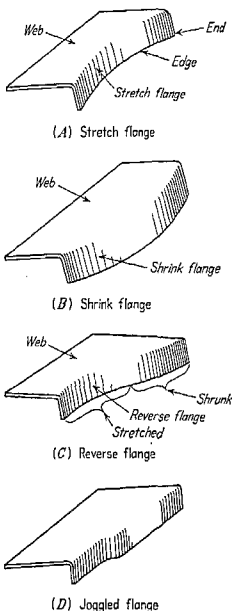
shows the two basic types of flanges—stretch and shrink. The reverse-type flange is a combination of these two. Any stretch flange can be considered as a segment of a flanged hole.
